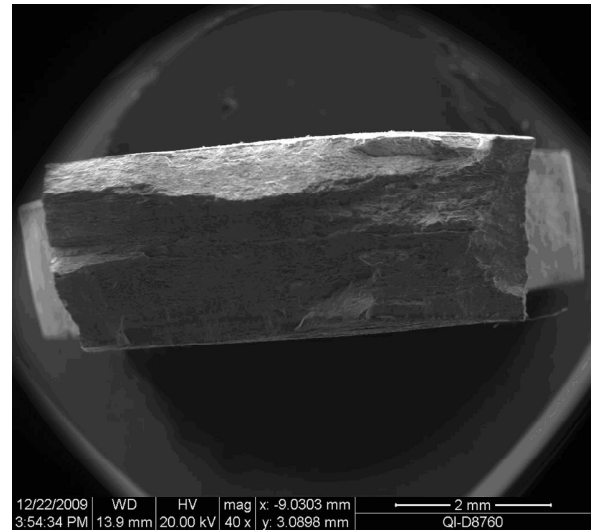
Macro morphology of the fracture of the Mo-N alloyed sample.
